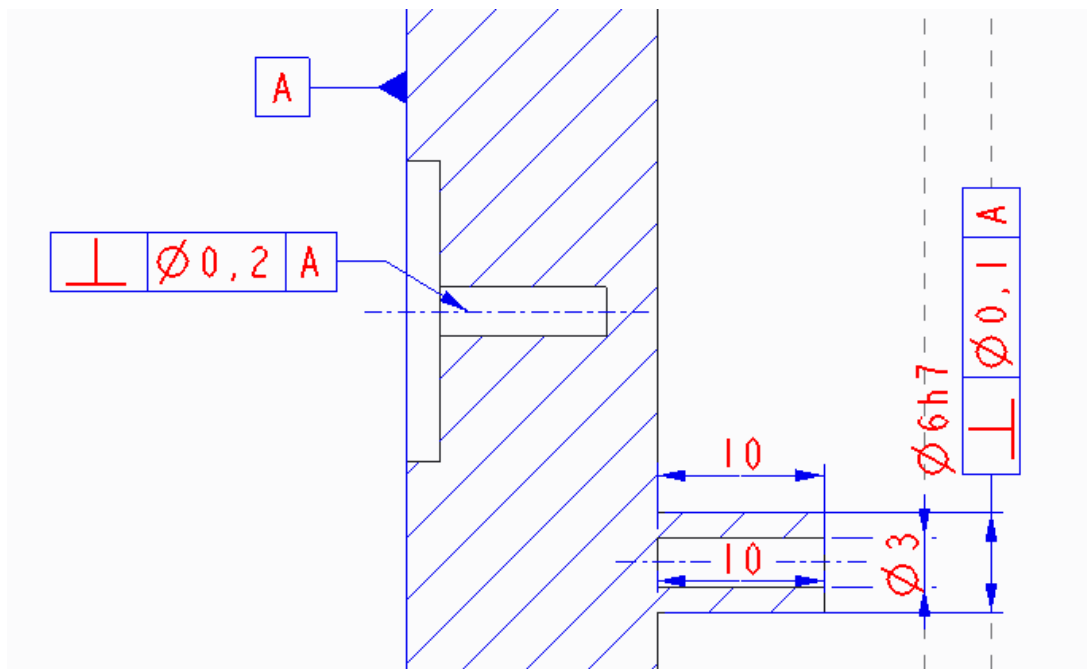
A new geometric tolerance created using *Dimension* as a *Placement*.
